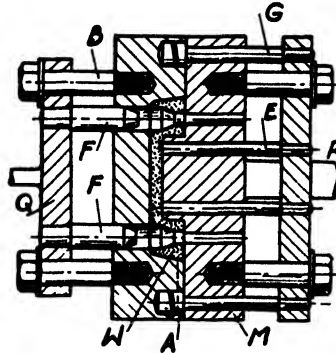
Die-casting Mold Operation—Stage 2.
